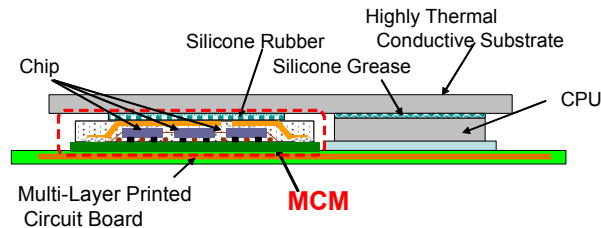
(b) Cross-sectional view of the MCM and a mounting method example. One of the good features of the MCM is that the surface cooling package can share the heat sink with CPU.
